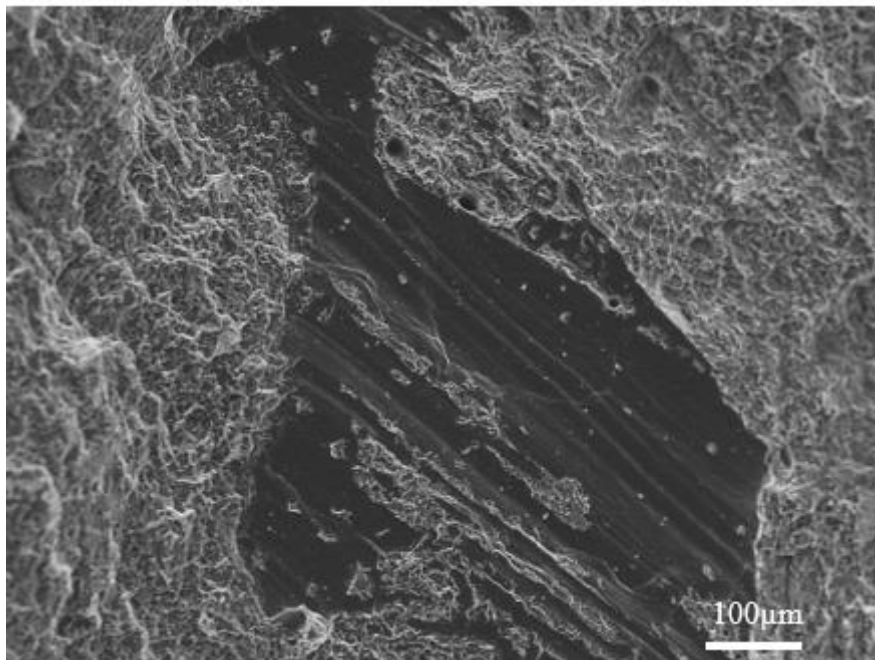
Dimples, voids and large surfaces that cannot fused with the next layer for 30T specimen. These unmelted large surfaces account for nearly 25 % of total fracture surface.
